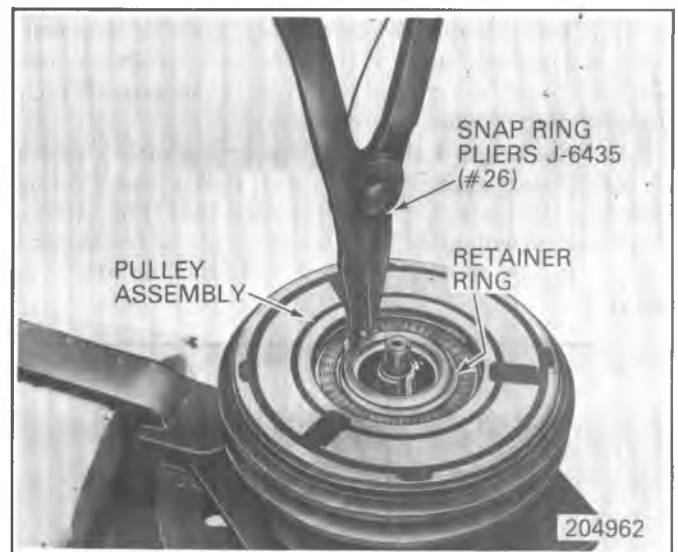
D-9 Removing A-6 Pulley Retainer Ring
